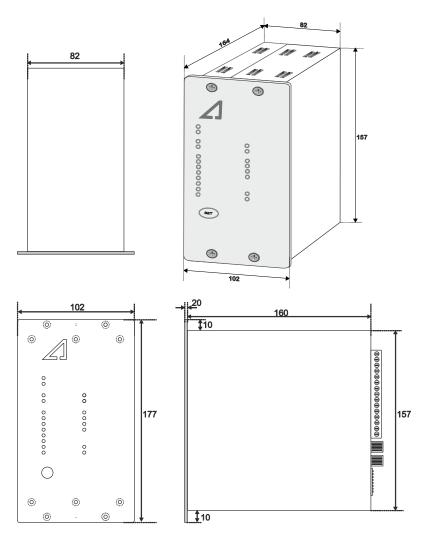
AQ110P device dimensions, all dimensions in millimeters.
